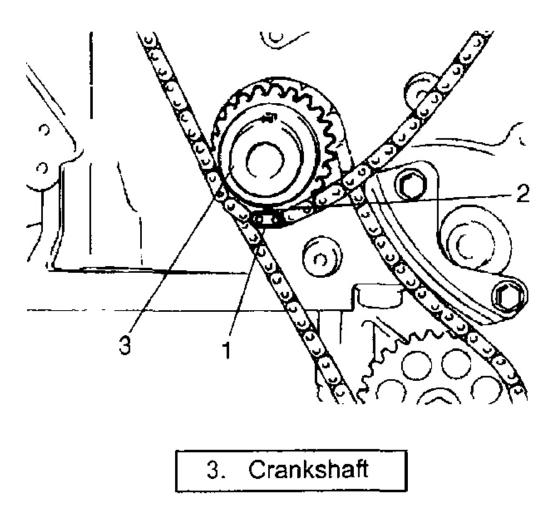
Installing Idler Sprocket No. 2 & Sprocket Shaft Courtesy of SUZUKI OF AMERICA CORP.
